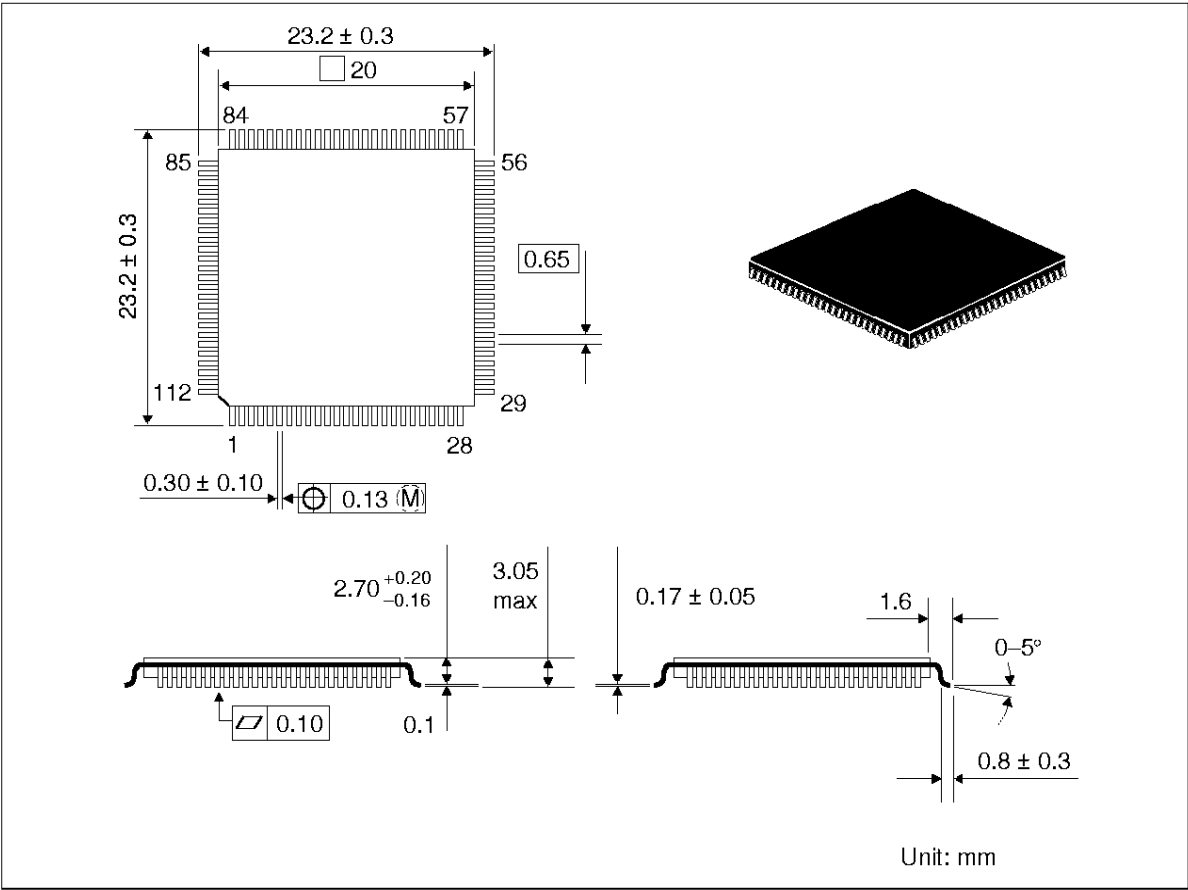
SH7040/42 Package Dimensions (QFP-112)
